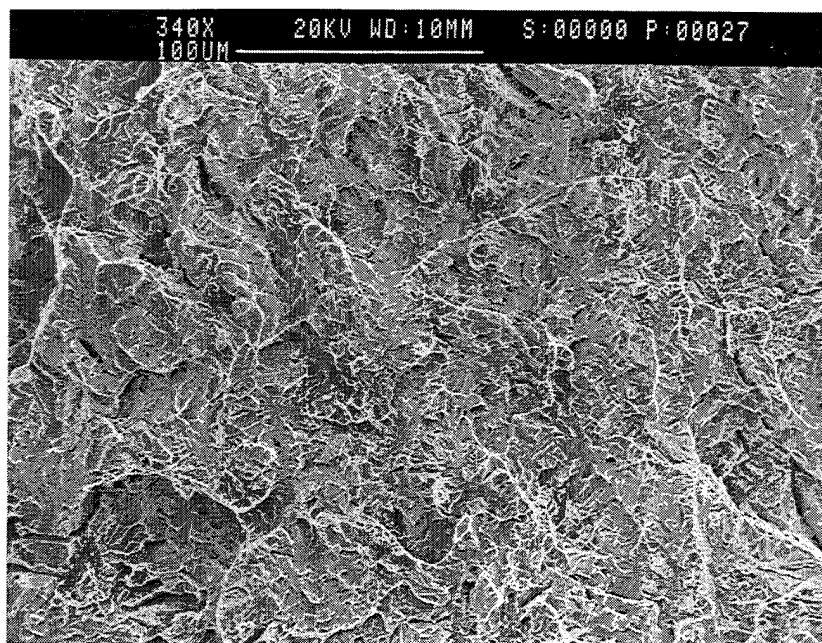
MV6 - GMA Weld Using Argon Cover Gas
